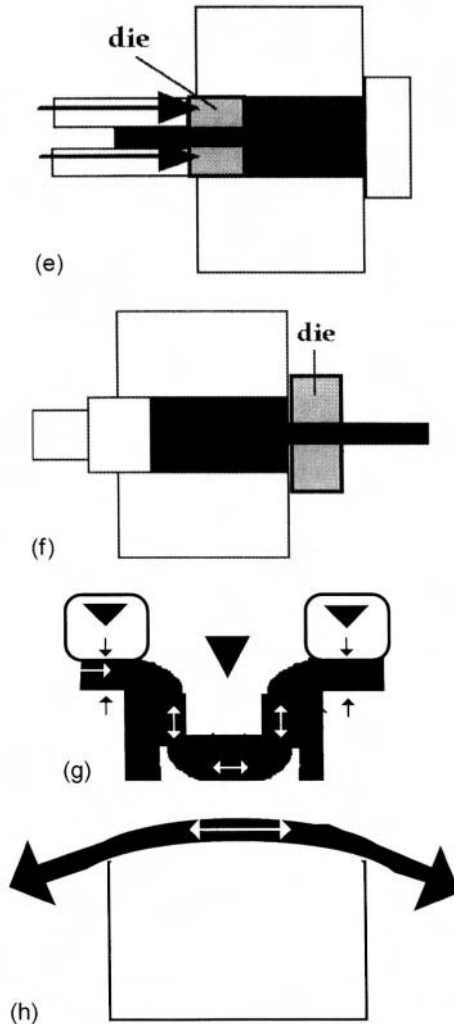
(e) Direct extrusion. (f) Indirect extrusion. (g) Deep drawing. (h) Stretching.
